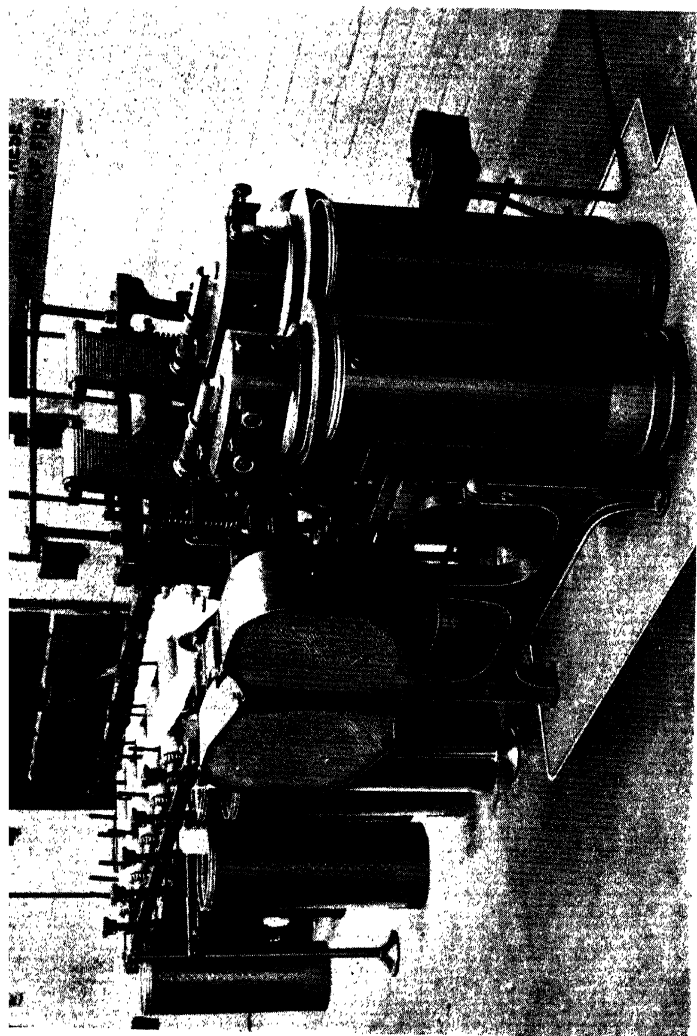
BRADFORD OPEN-DRAWING INTERSECTING GILL BOX
